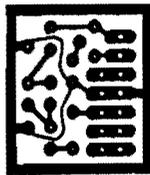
PIN driver PCB (0.8mm single-sided FR4).
